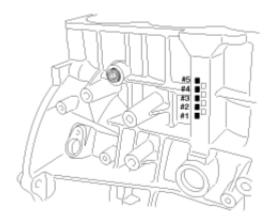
Identifying Crankshaft Bore Mark Location Courtesy of HYUNDAI MOTOR CO.
